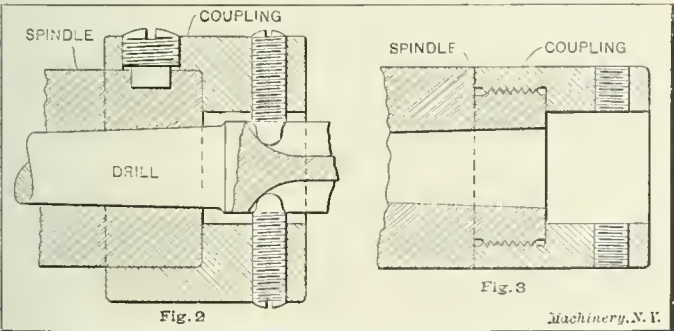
Coupling applied to Drill Spindle with Short Projecting Edge
